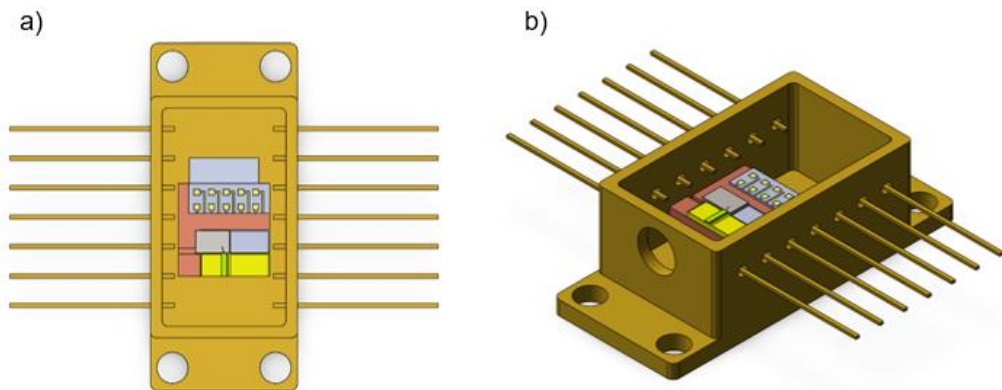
Schematic of packaged assembly - a) top view. b) isometric view.
